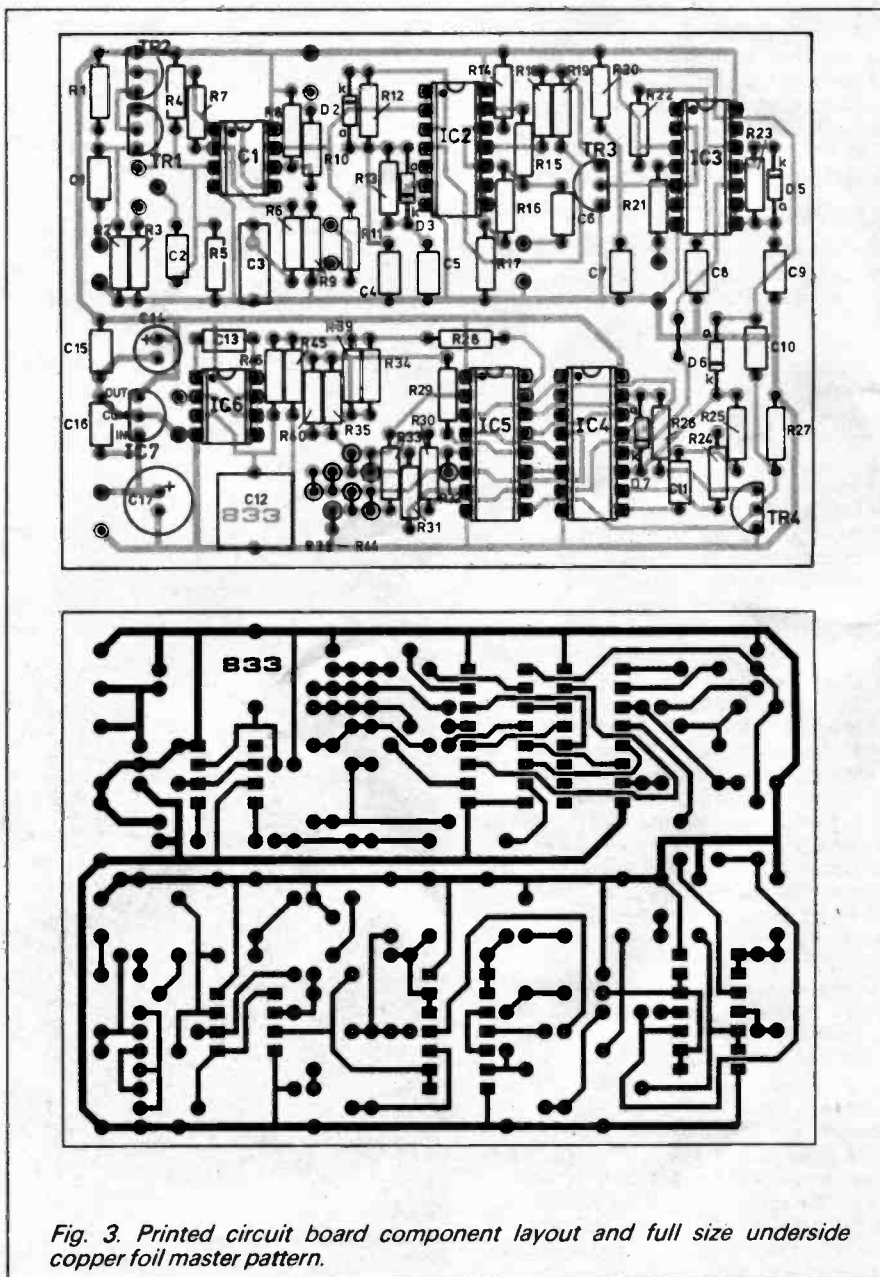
Printed circuit board component layout and full size underside copper foil master pattern.
